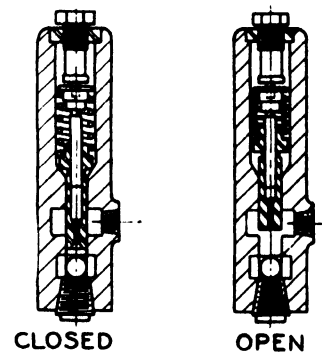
Type QS relief valve. (*The Oilgear Co., Milwaukee, Wis.*)
